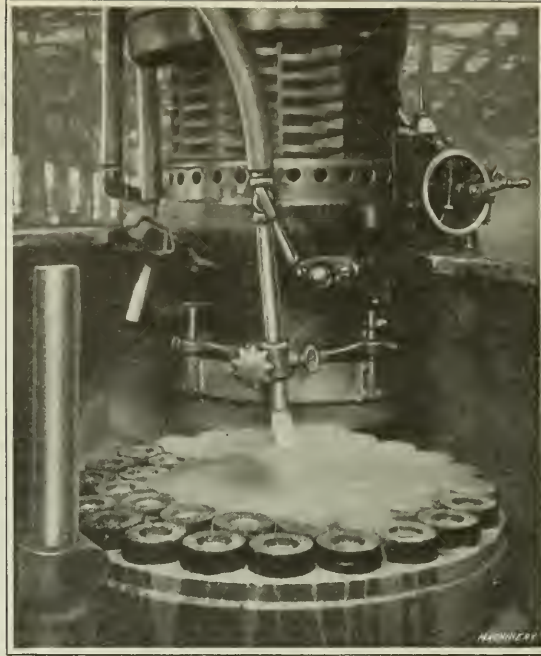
Delivering Coolant to Wheel on Blanchard Surface Grinder
